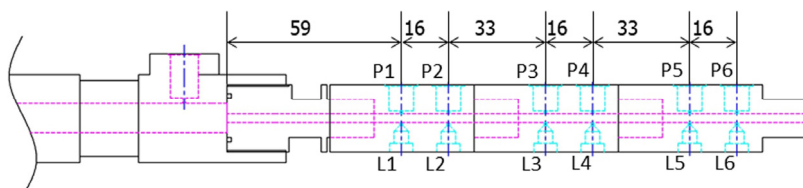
Secondary chamber & Extension Tube (Diameter : 3 mm / Length : 200 mm).
